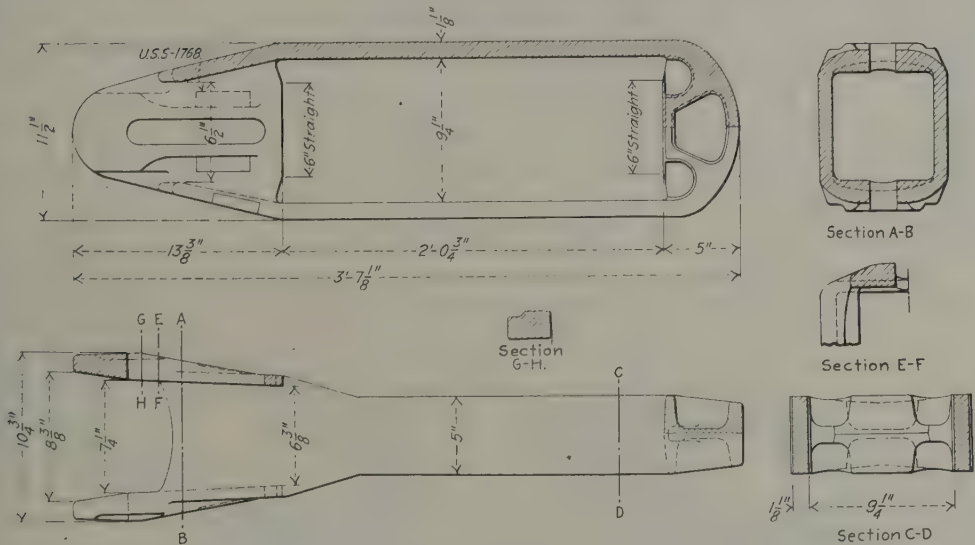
Application of Buckeye Cast Steel Keyed Yoke for Twin Spring Gears.
